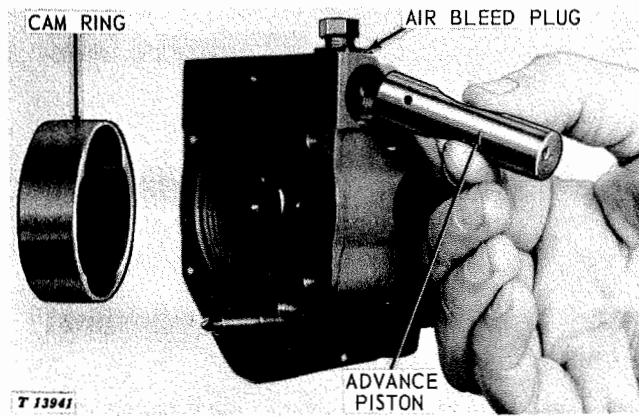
Removing Cam Ring, Advance Piston, and Air Bleed Plug
